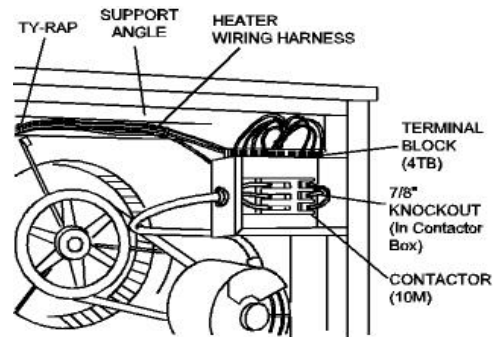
CONTACTOR BOX & HARNESS SUPPORT
